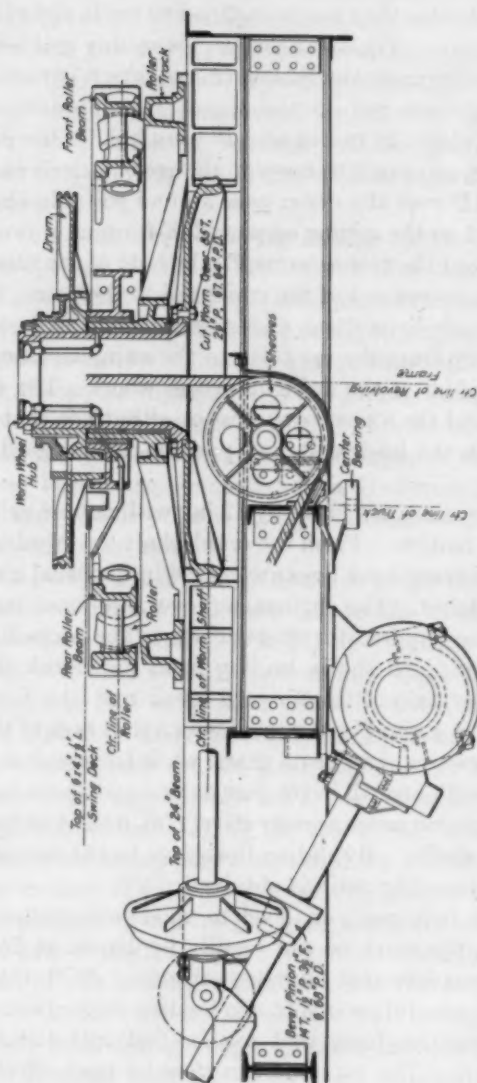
PLAN AND SECTIONAL ELEVATION OF SWINGING AND PROPELLING MECHANISM OF THE LOCOMOTIVE PILE DRIVER
